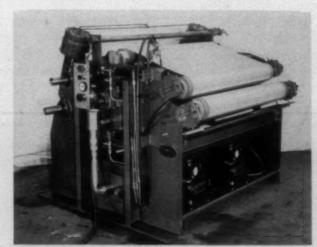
This is a rear view of the Rodney Hunt Saturator. Material flow would be from right to left as the machine is shown here. A feeler for the guider assembly assures even tracking of the screens.
